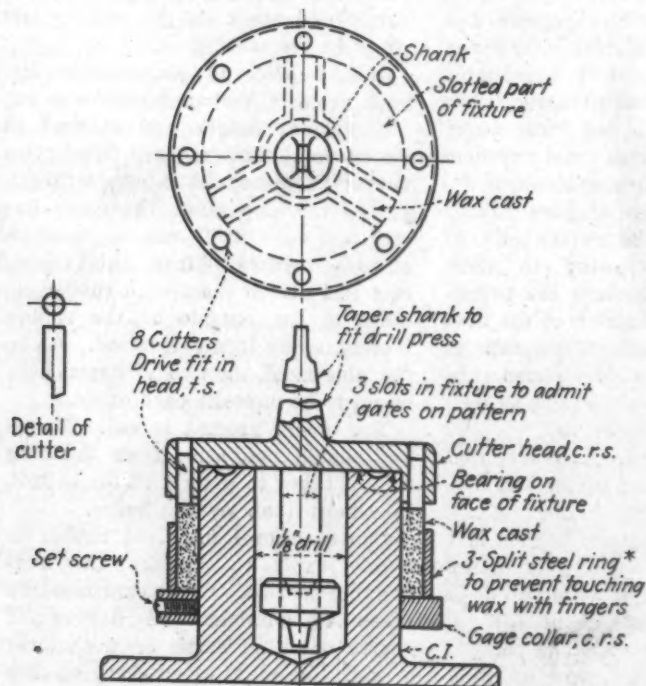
Design of trimming fixture for removing bosses or traces left by gates.
